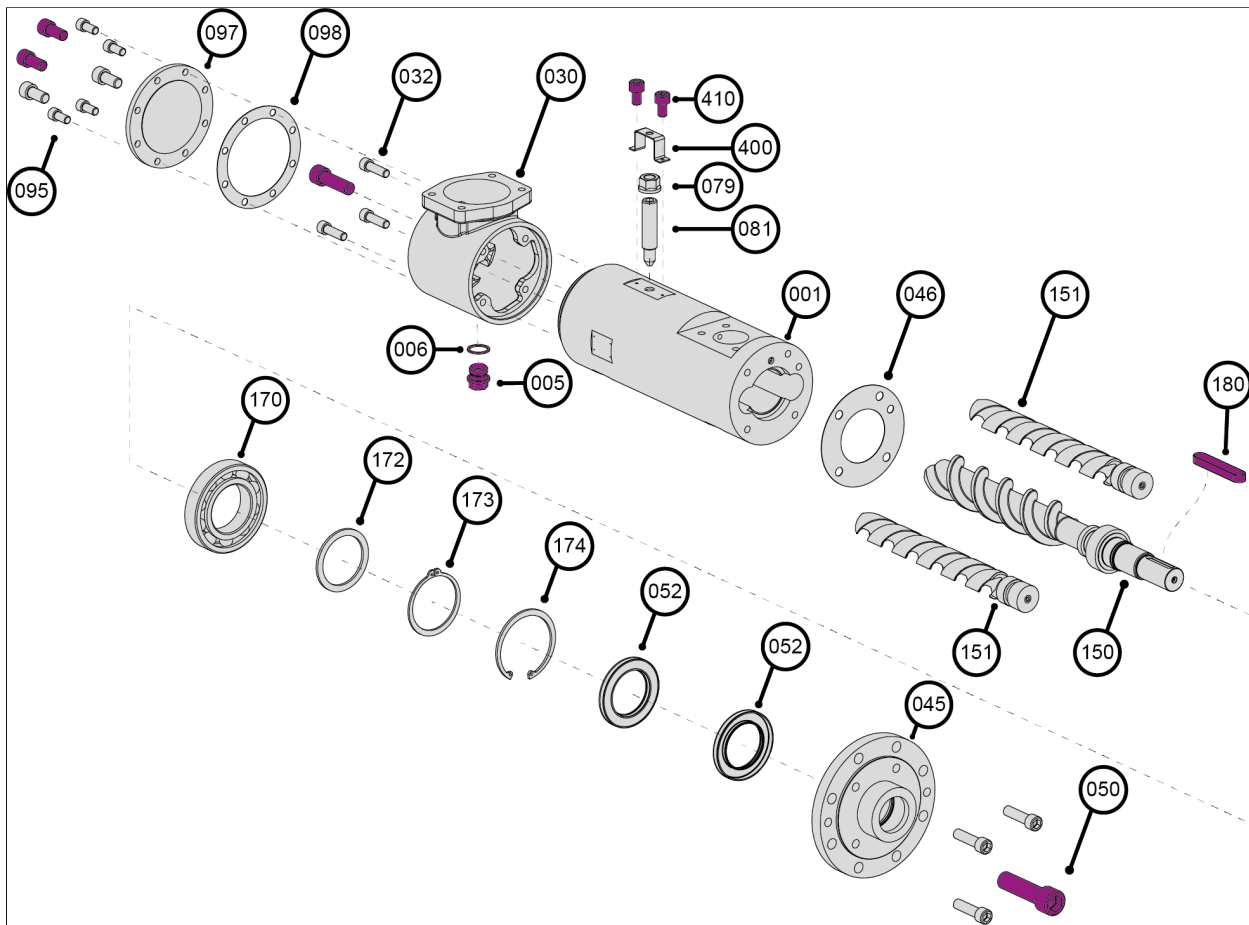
Component overview L3MF IFOKSO-W (example figure)
